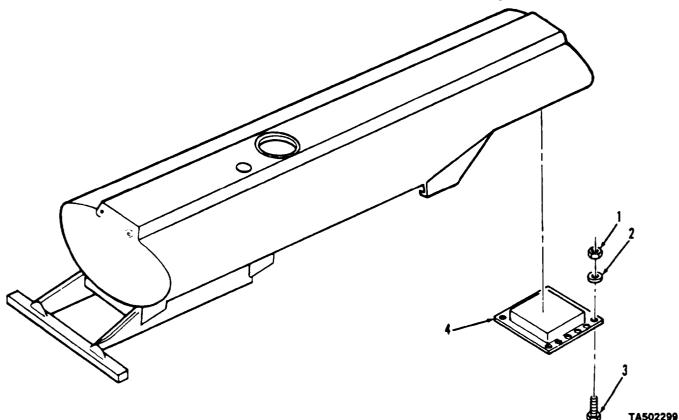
, Upper Coupler (Kingpin) Plate (Later Models)
